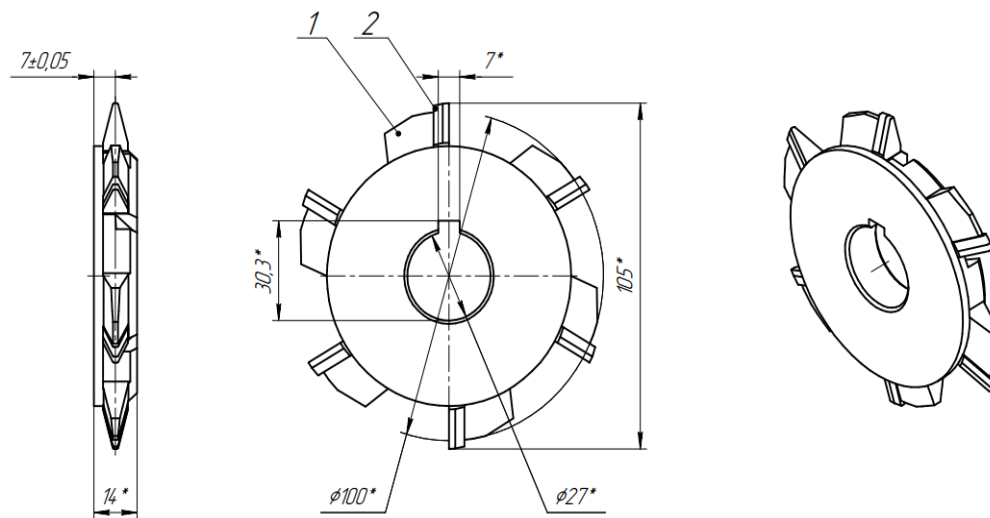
Special disc cutter for cutting trapezoidal profile threads.
